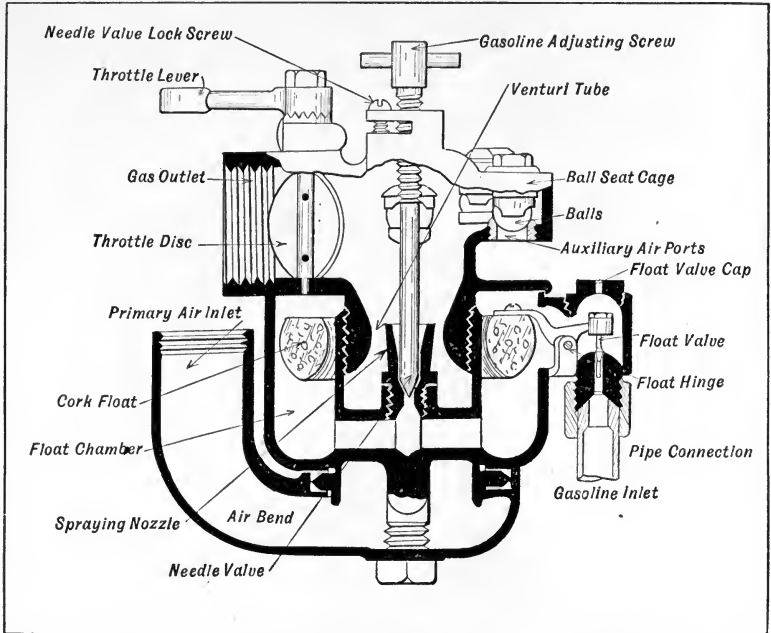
Kingston Automatic Carburetor Admits Auxiliary Air Through Ball-Controlled Ports at Side of Mixing Chamber.
